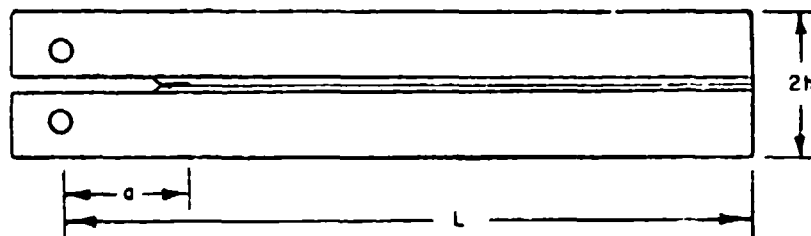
Double Cantilever Beam (DCB) Specimen with Side Grooves.
